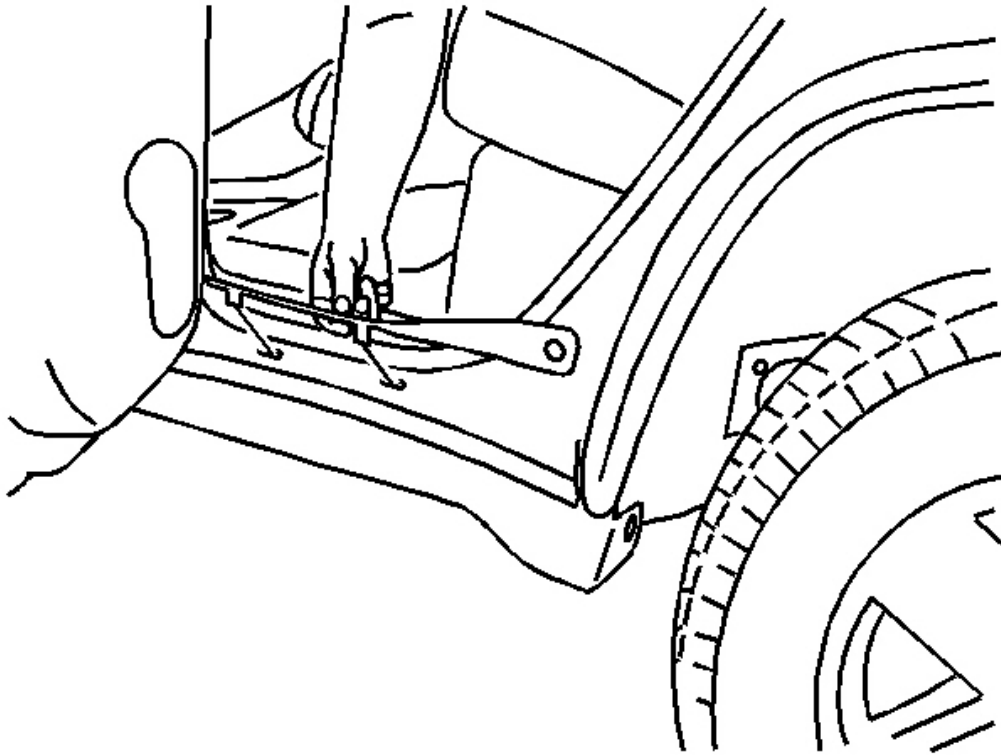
Identifying Rocker Molding Scuff Plate
